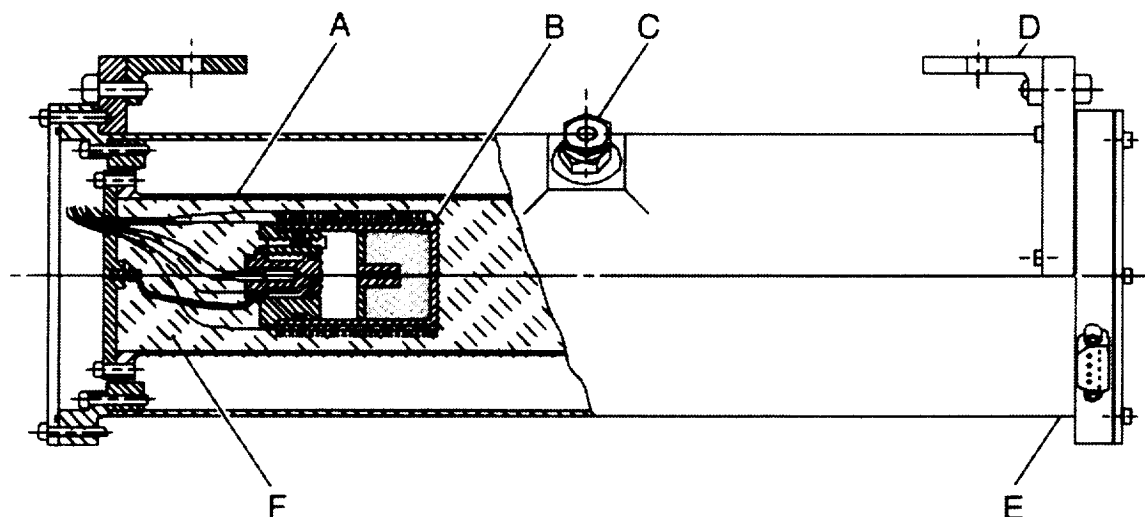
Cut-away view of assembled Moderate Temperature Facility oven. Primary components are: (A) inner cylinder, (B) crystal growth cell, (C) vacuum vent port, (D) mounting brackets, (E) outer cylinder, and (F) polyimide foam insulation.
